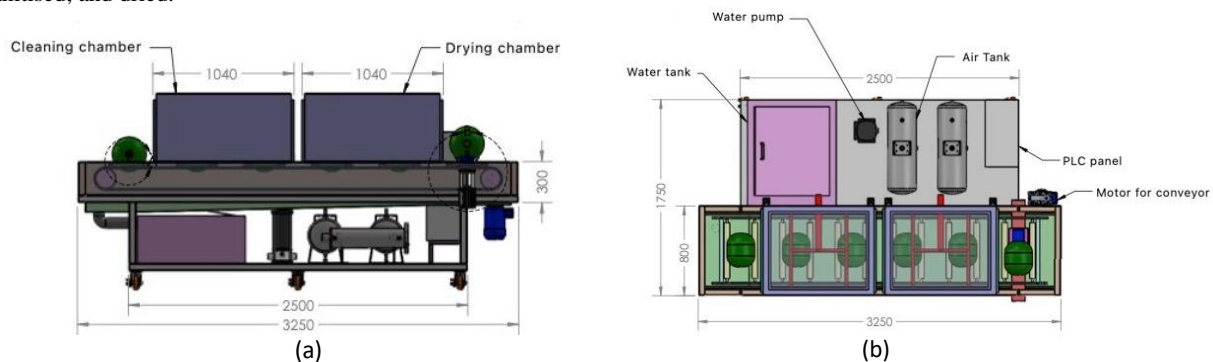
Schematic diagram of watermelon cleaning machine. (a) Front view; (b) Top view
